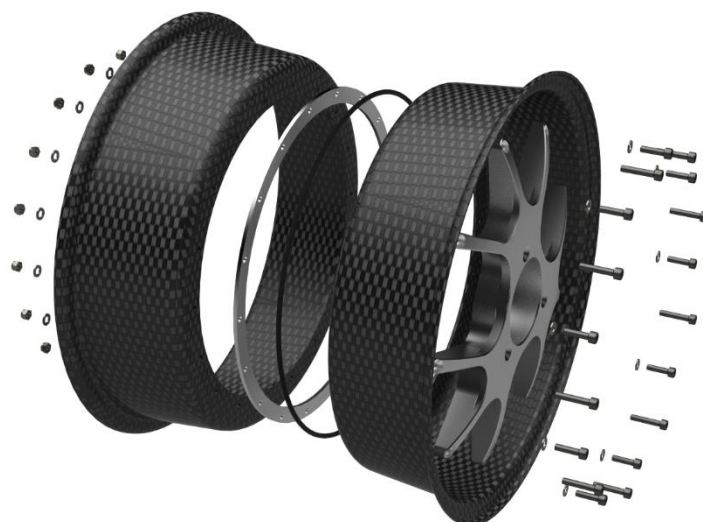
An exploded CAD assembly render of a rear wheel, featuring the wheel shells, centre, O-ring, spacer and fasteners.
